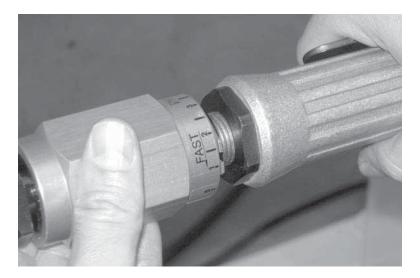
Turn the speed control collar to adjust the rotation speed of the machine.
